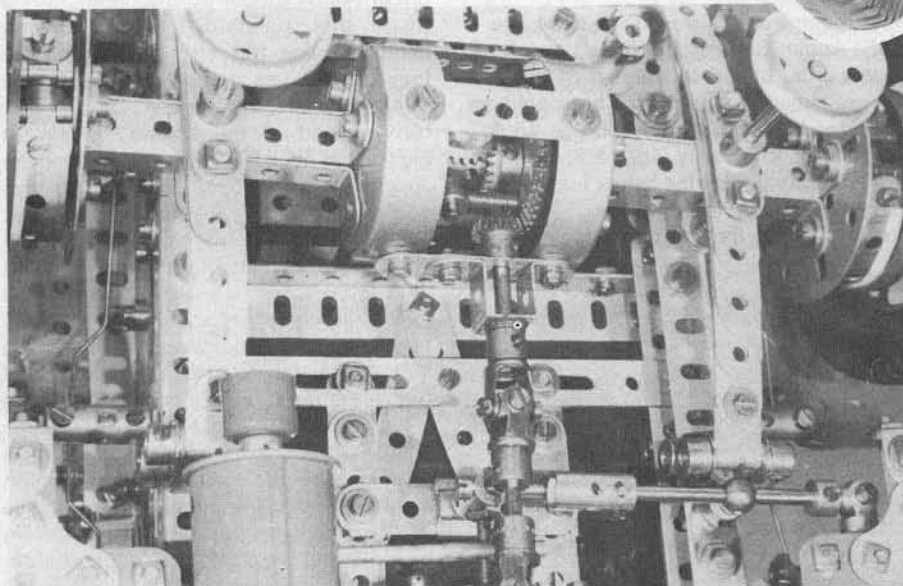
Rear axle construction and double-slide under-chassis gear linkage. Note exhaust tail, double universal couplings and suspension spring shackles.
